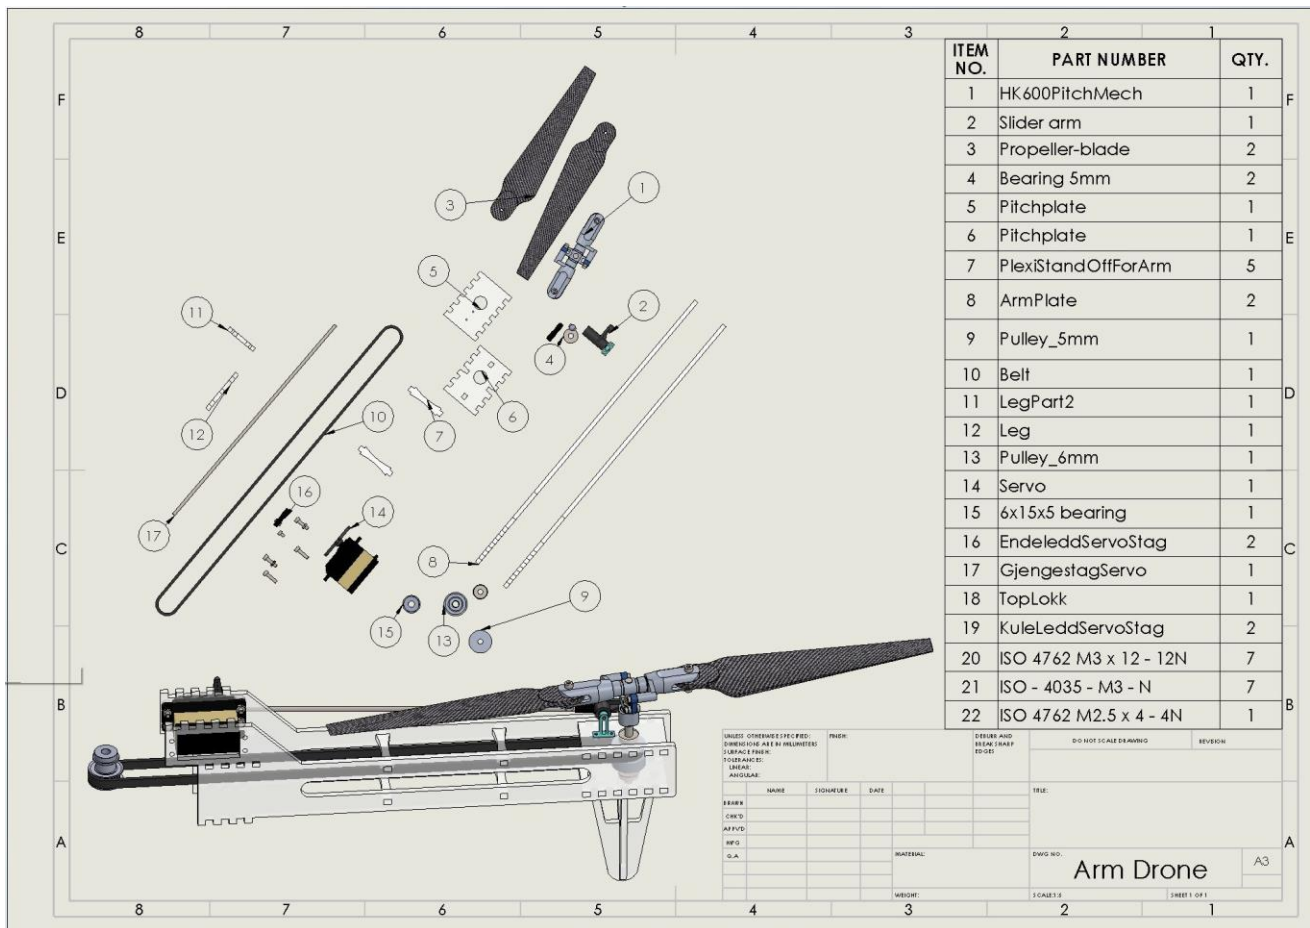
2D Drawing, Exploded View & BOM of one of the four arms
